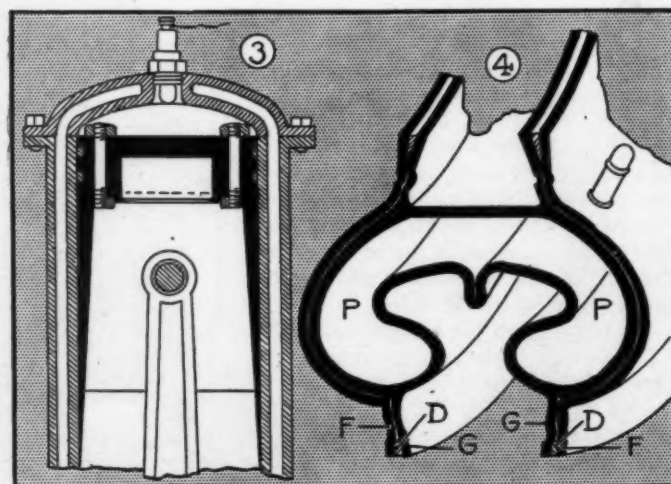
Bates combustion motor. Fig. 4—Galvin pneumatic tube
